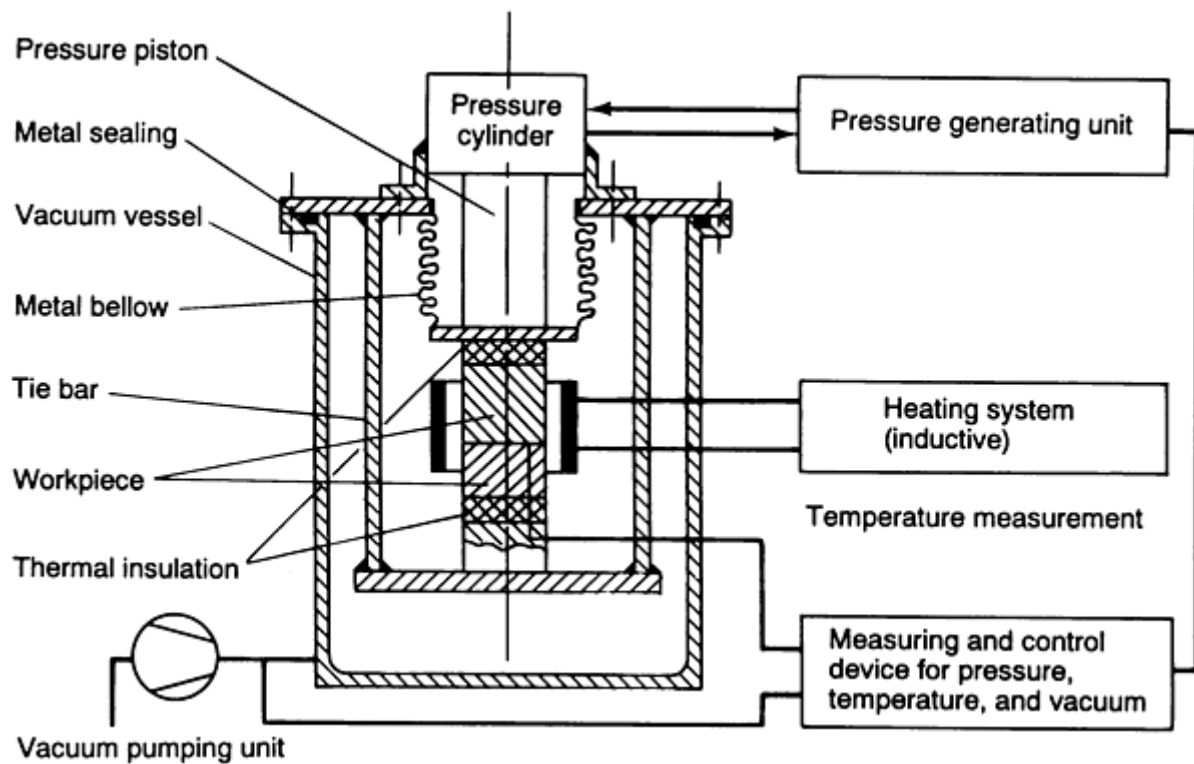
PRINCIPLE OF OPERATION OF TYPICAL HIGH-TEMPERATURE SOLID-STATE WELDING EQUIPMENT
